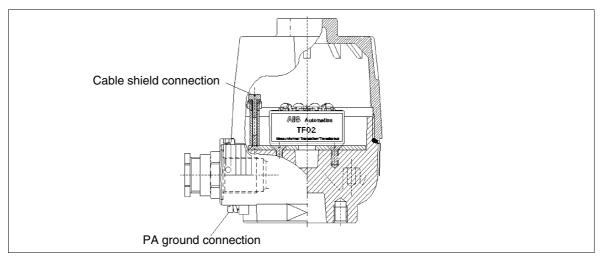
Detail Drawing TF202 / TF202-Ex
